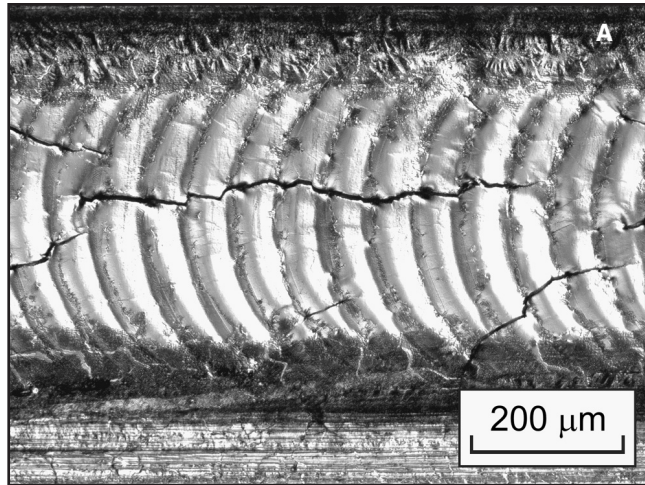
Cracks in 6061-T6 aluminum pulsed Nd:YAG laser seam weld. A — Top weld bead showing overlapping spot welds and solidification cracks; B — transverse section solidification and liquation cracks.
